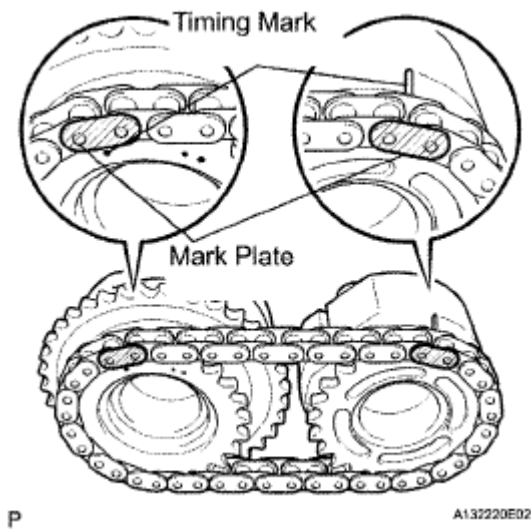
Aligning Mark Plate With Timing Marks Of Camshaft Timing Gears
